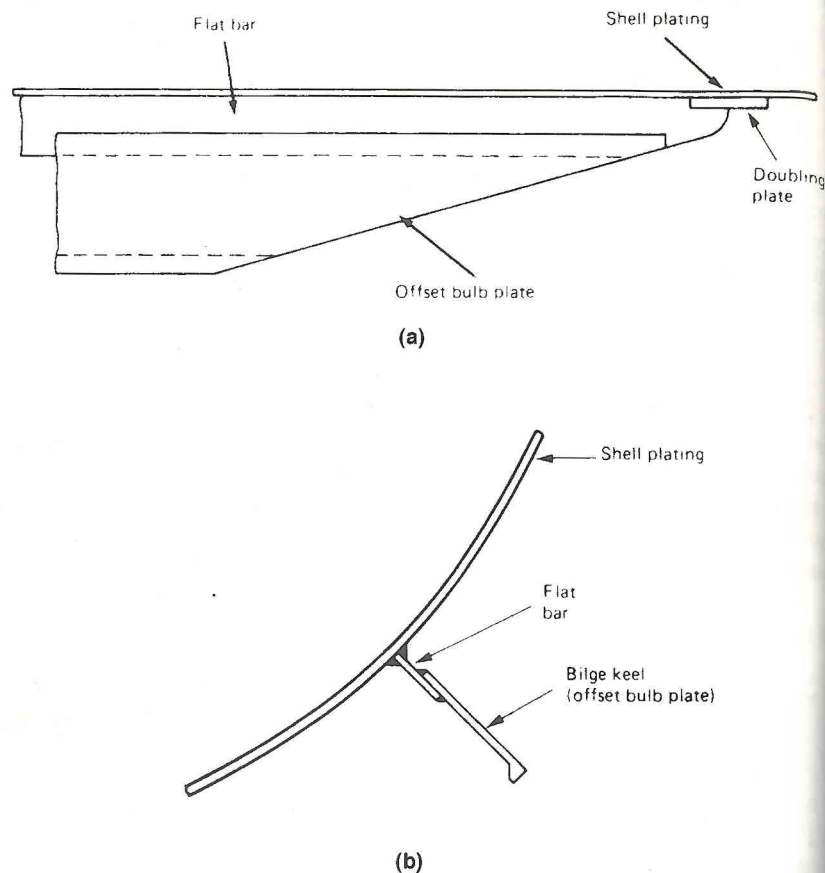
Bilge keel: (a) plan view showing arrangement at ends; (b) section through bilge keel
